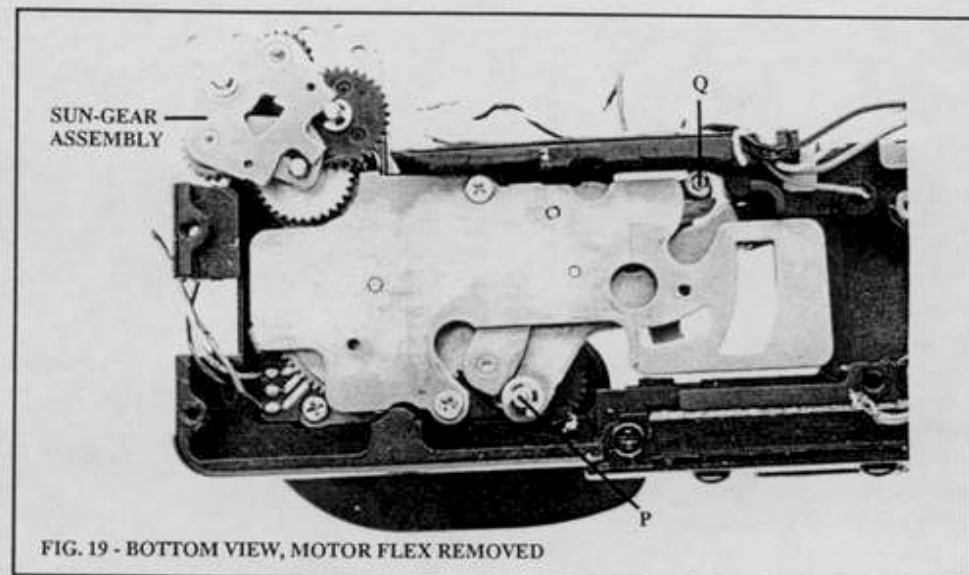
BOTTOM VIEW, MOTOR FLEX REMOVED
